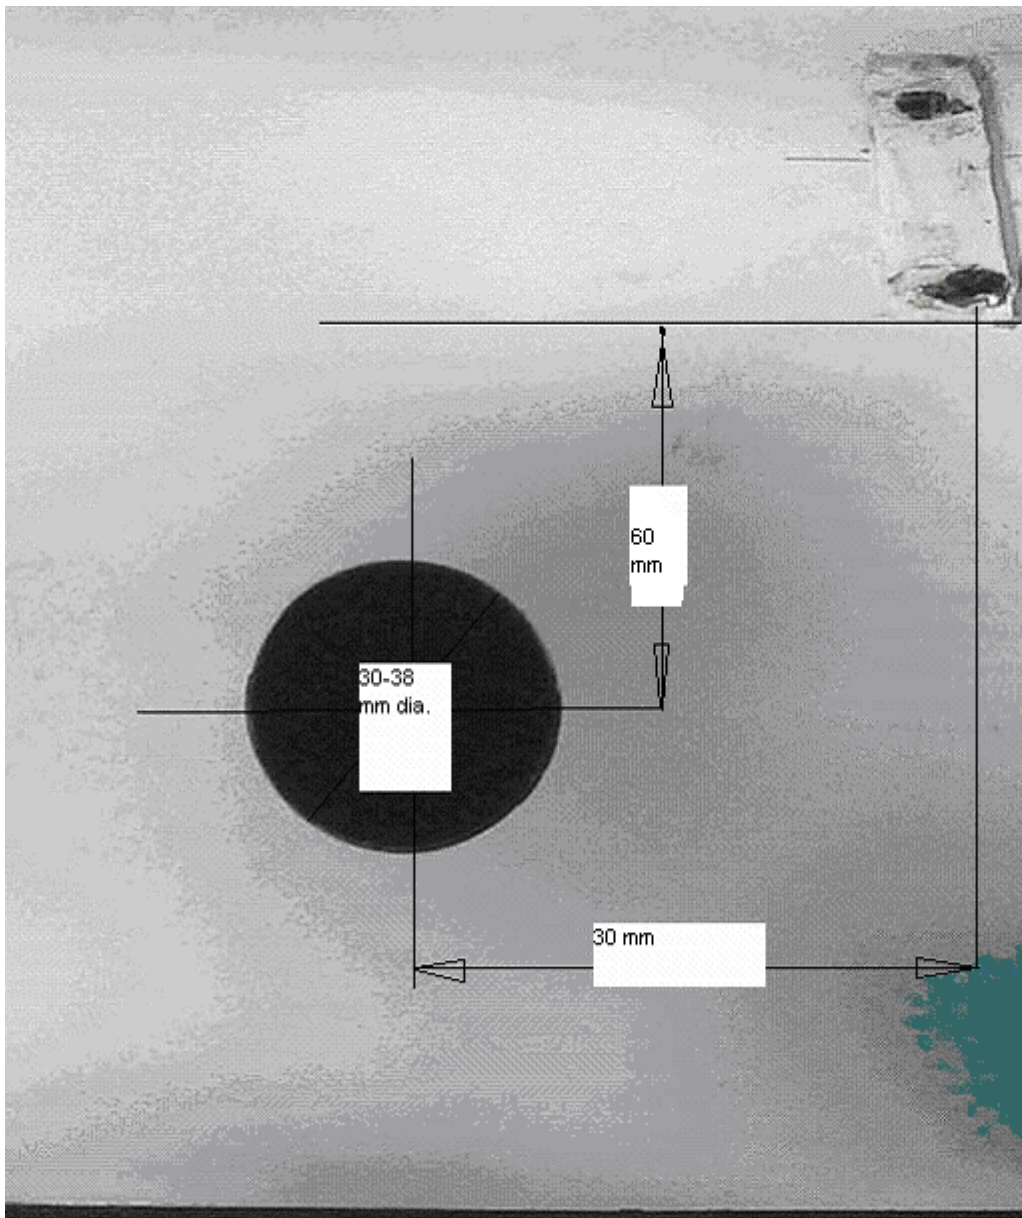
inspection hole in wing trailing edge, inboard of bracket skin holes. Wing shown upside down.
